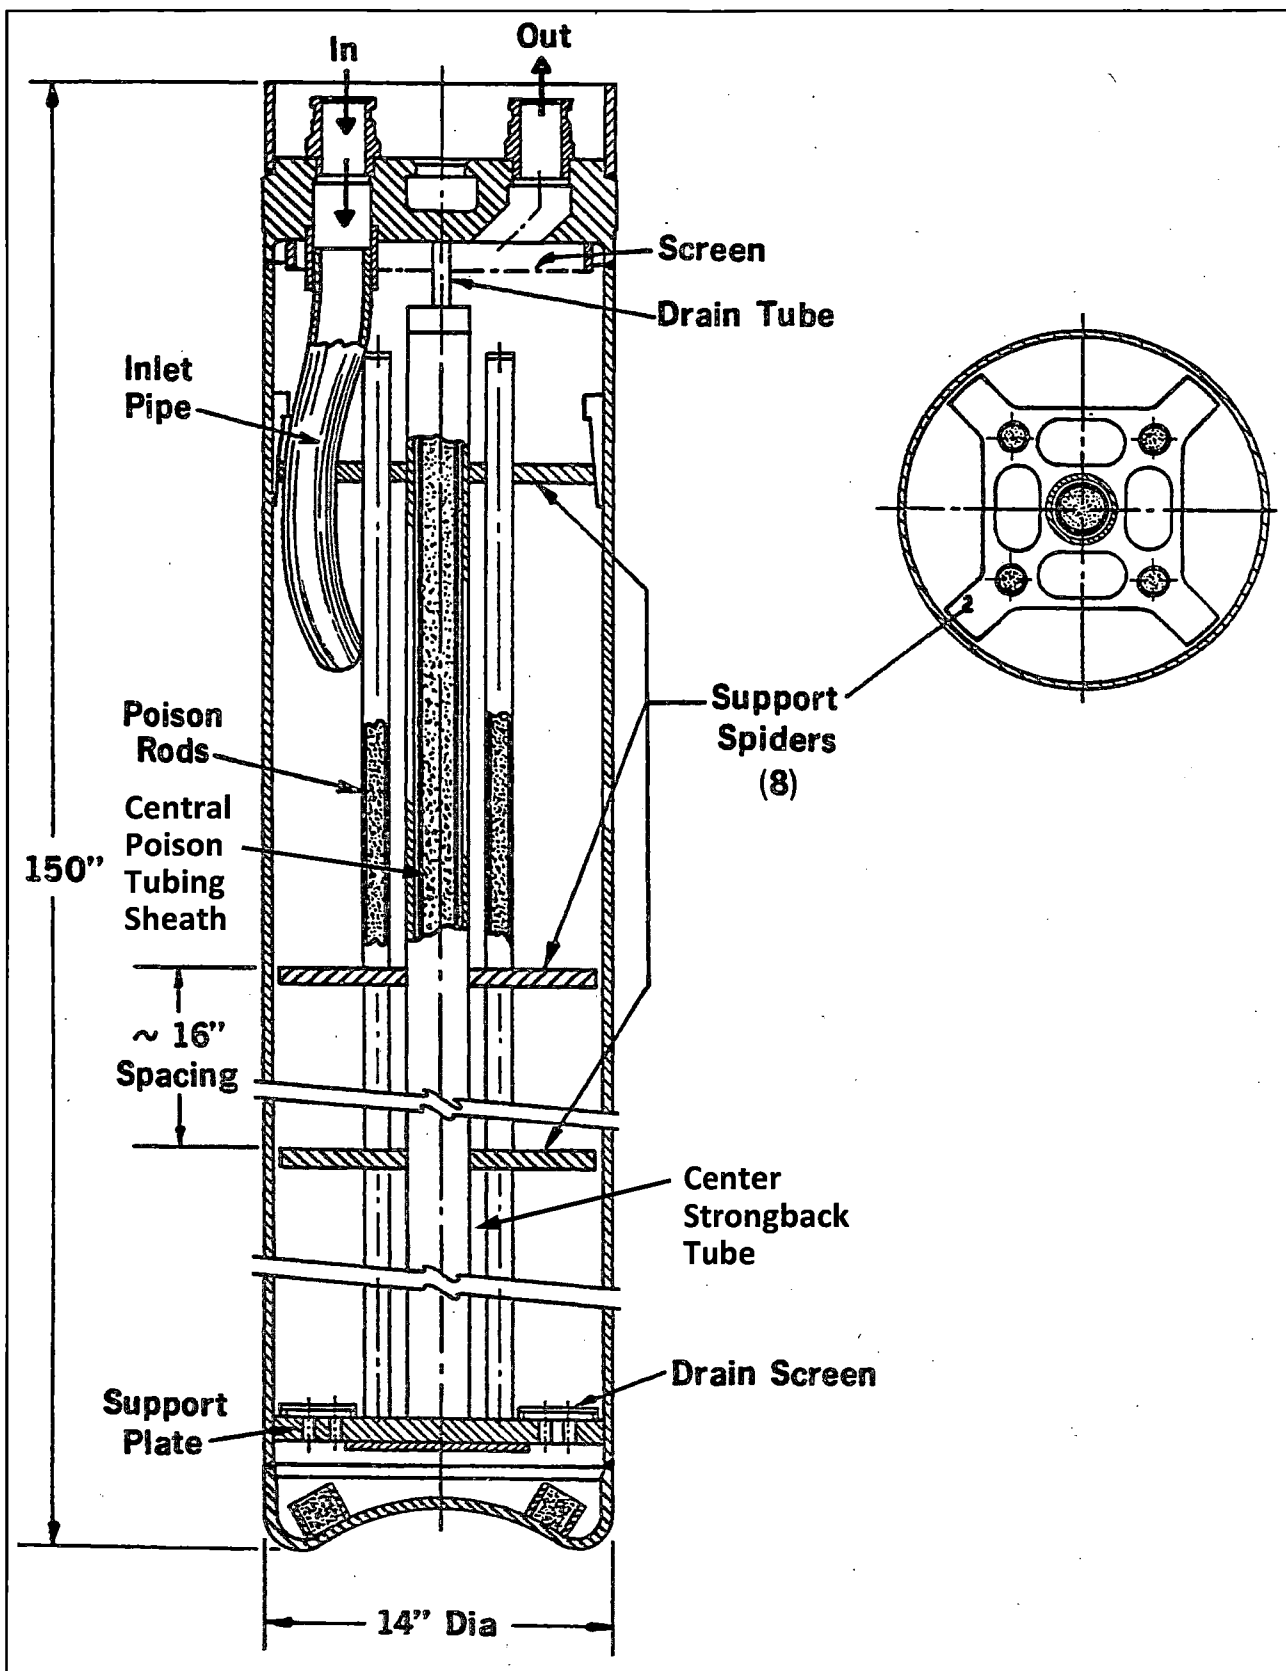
Overall Cross-sectional Profile View of TMI-2 Knockout Canister with Intermediate Support Plate Plan View Inset
